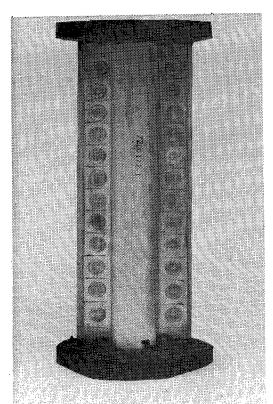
Stringer Side of Typical Spotwelded Crippling Specimen. (Neg. 126910B)
